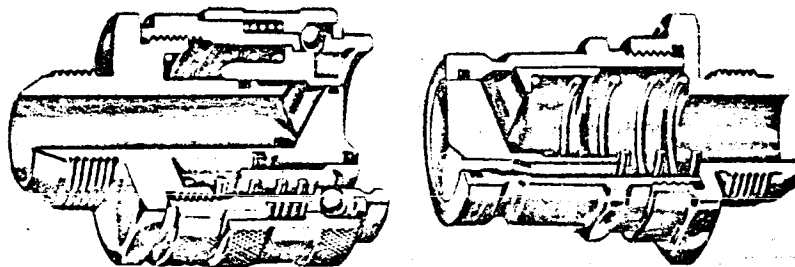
Booster Liquid Oxygen Disconnect-Valve Assembly
